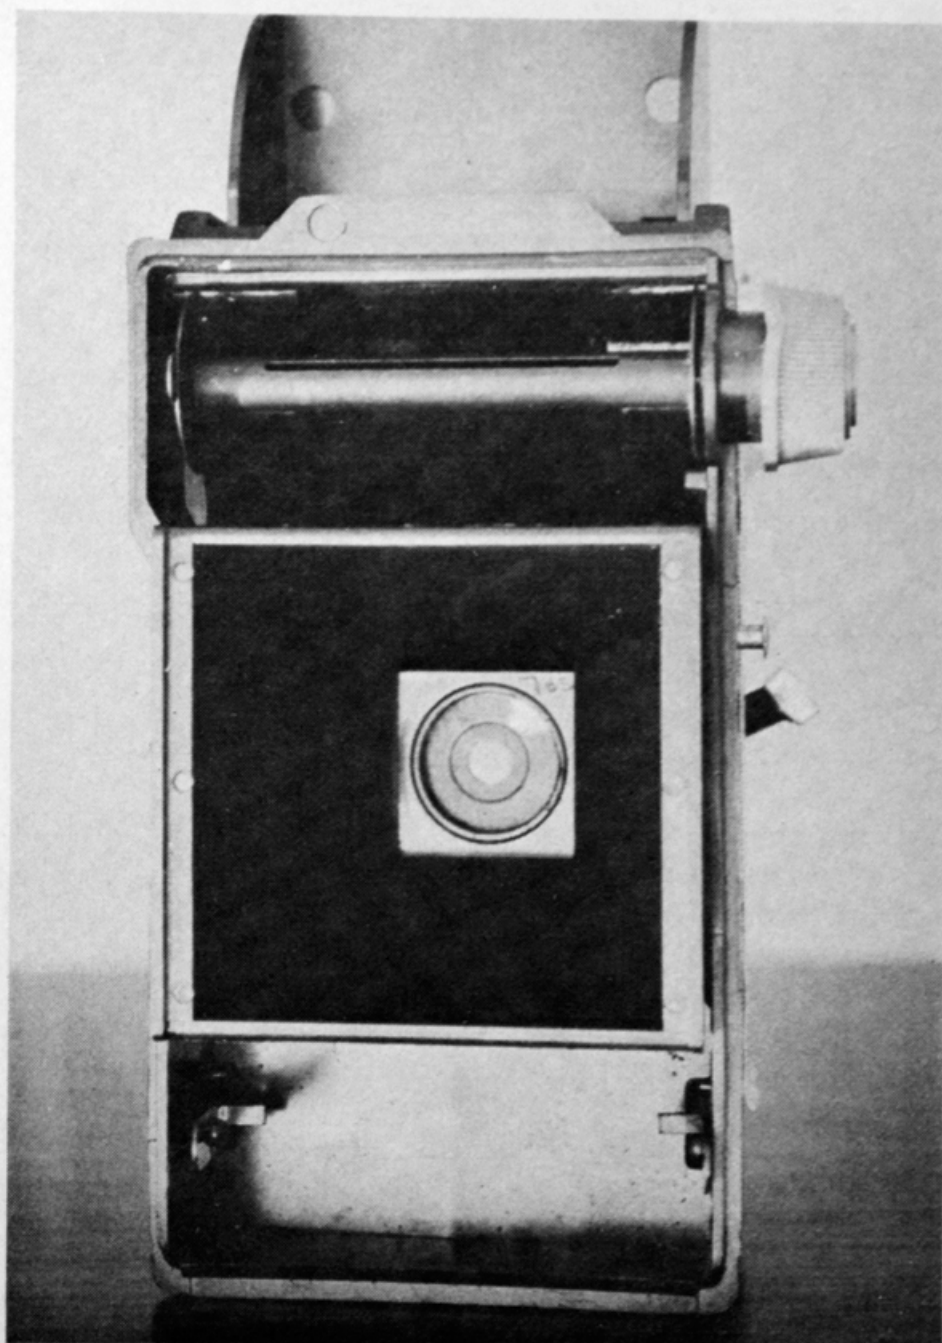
Dimples produced by injection molding distorted the edges of the film support on both sides.
